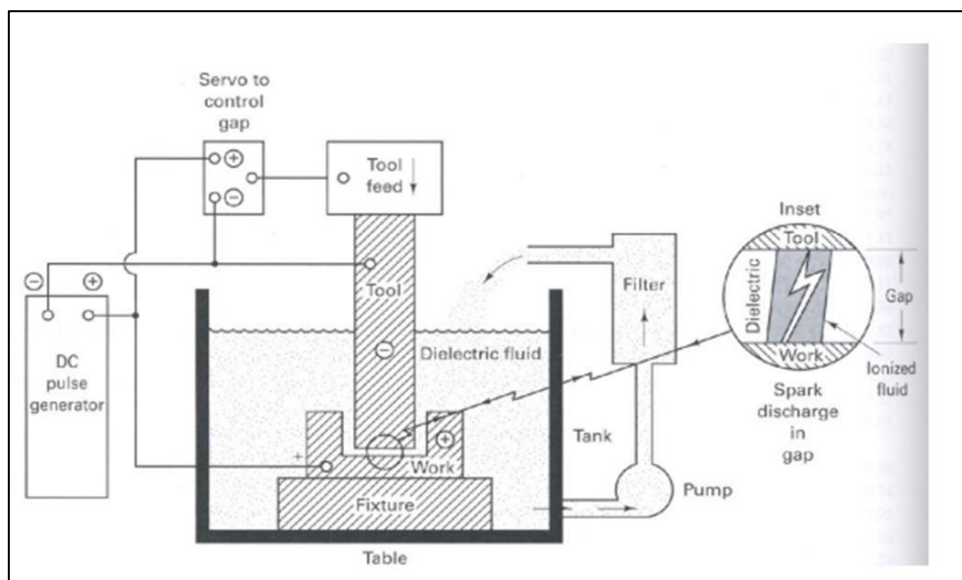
EDM or spark erosion machining of metal, using high-frequency spark discharge dielectric, between the shaped tool (cathode) and the work (anode). The table can make X-Y movements.
